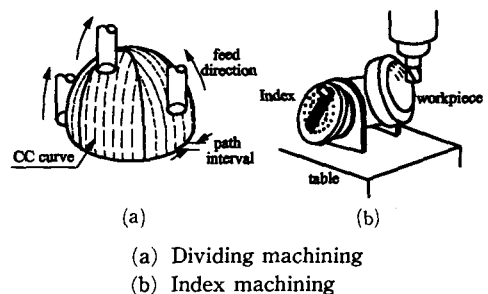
Two machining methods on a 3-axis inclined endmilling
